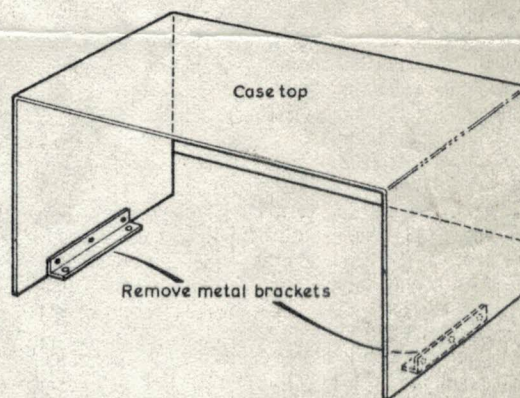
In the standard design, the case top is fixed to the chassis with two welded metal brackets. These are removed in the author's modifications
